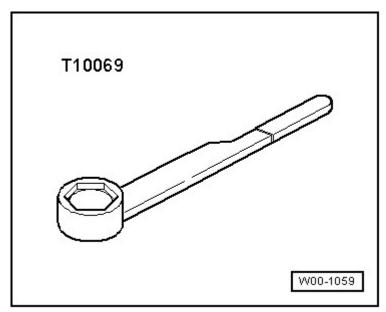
Counter-Holder Tool T10069 Courtesy of AUDI OF AMERICA, LLC
